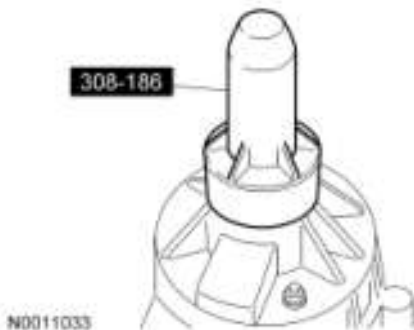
Installing Rear Output Shaft Oil Seal Using Special Tools (308-186)
